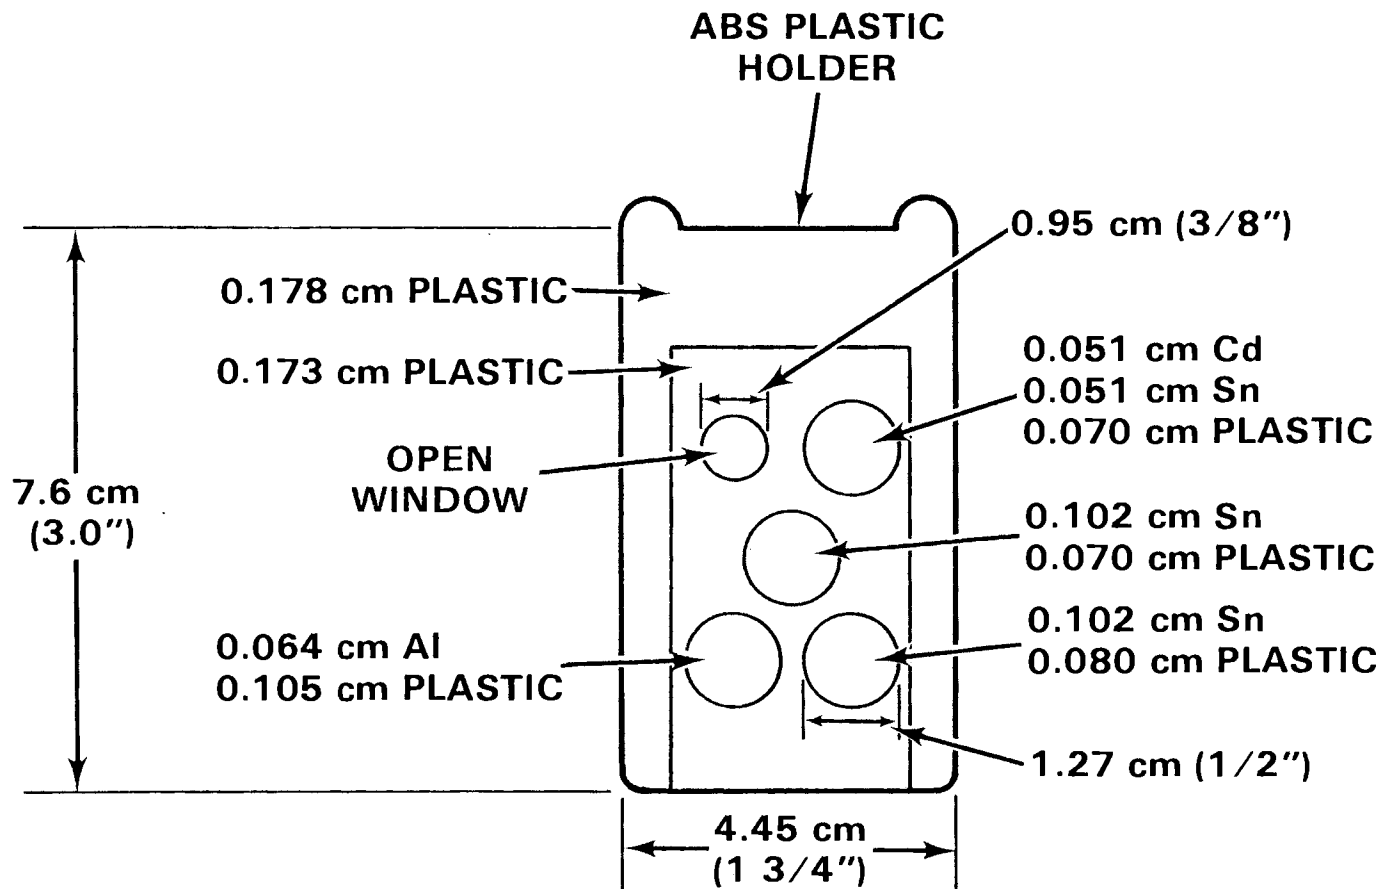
Front View of Dosimeter Holder (actual size)
